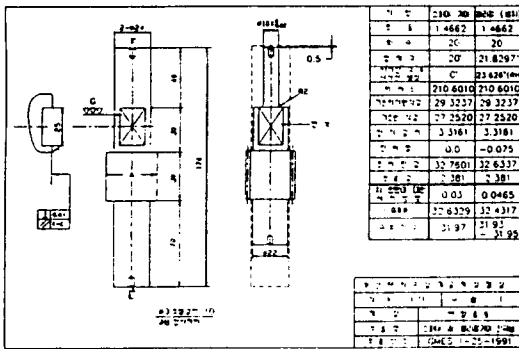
Drawings of spur and helical gear extrusion electrode for electric discharge
